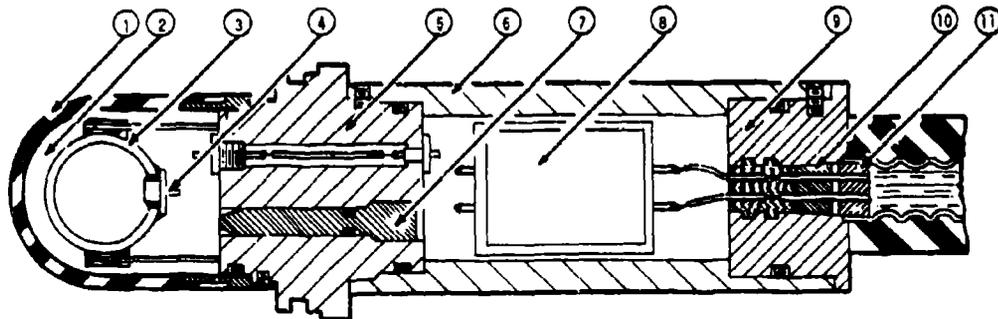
Sectional view, type H48 hydrophone: (1) butyl window; (2) castor oil; (3) sensitive element; (4) glass-to-metal seal; (5) mounting plug; (6) housing; (7) oil plug; (8) transistorized preamplifier; (9) cable plug; (10) cable terminal; (11) cable spacer.
